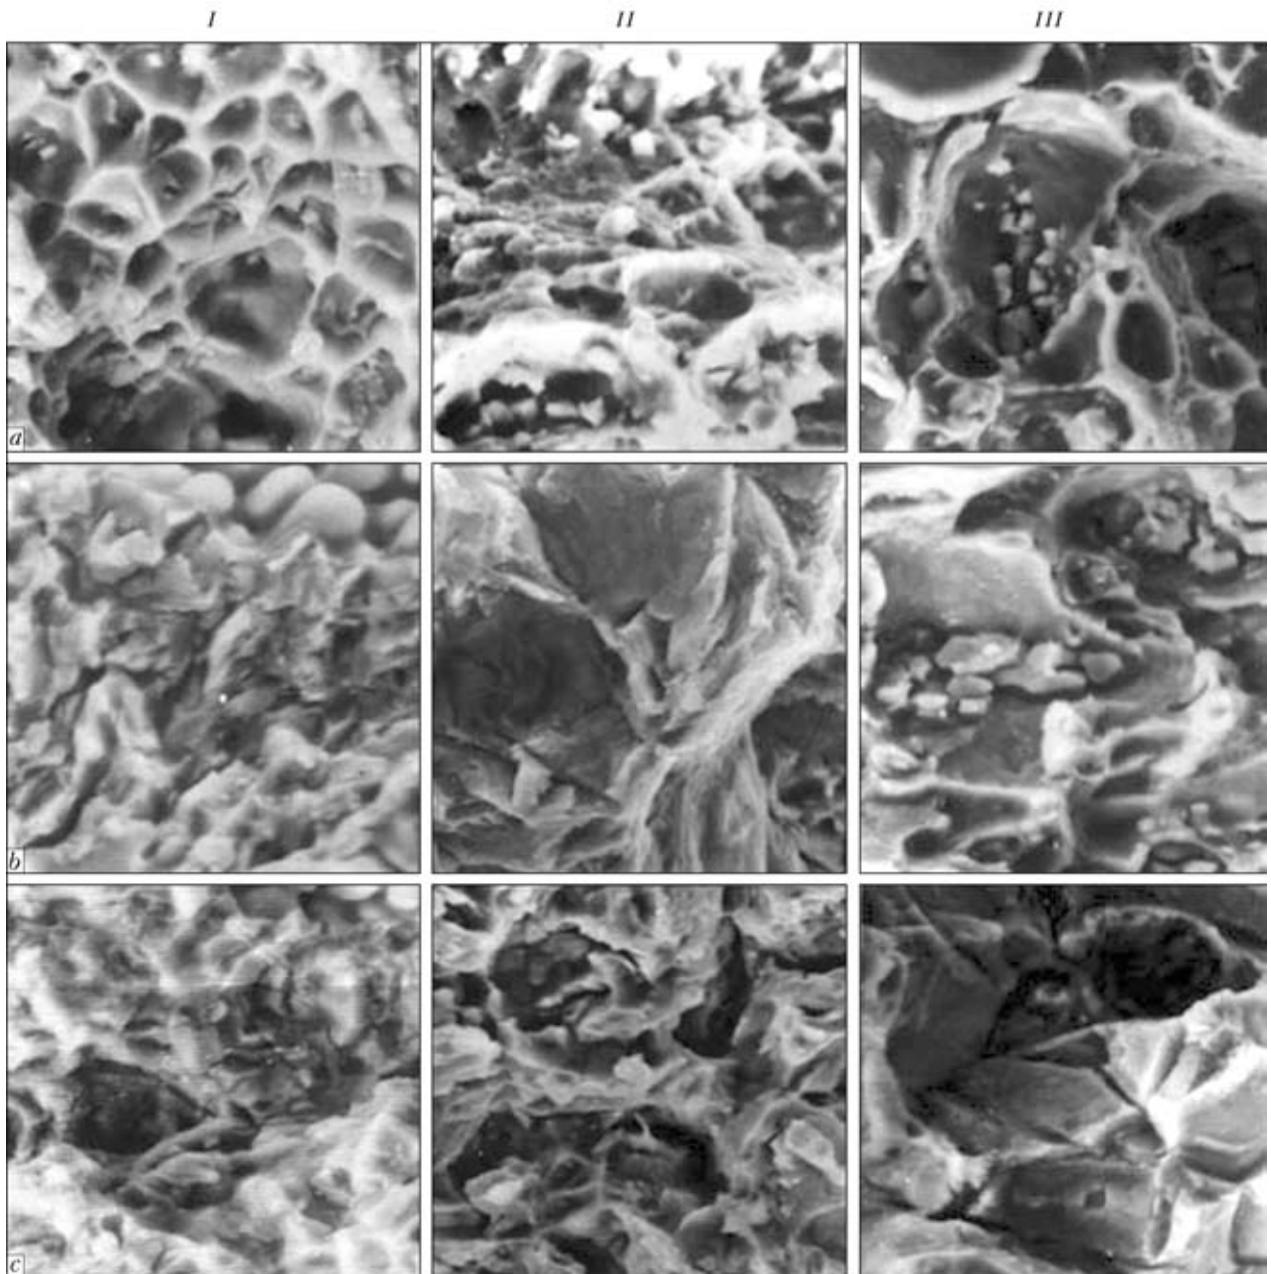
Fractograms of fracture surface of individual zones of welded joint of AMg6N alloy tested at the temperature of 293 (a), 77 (b) and 20 (c) K: I – W; II – FZ; III – HAZ
